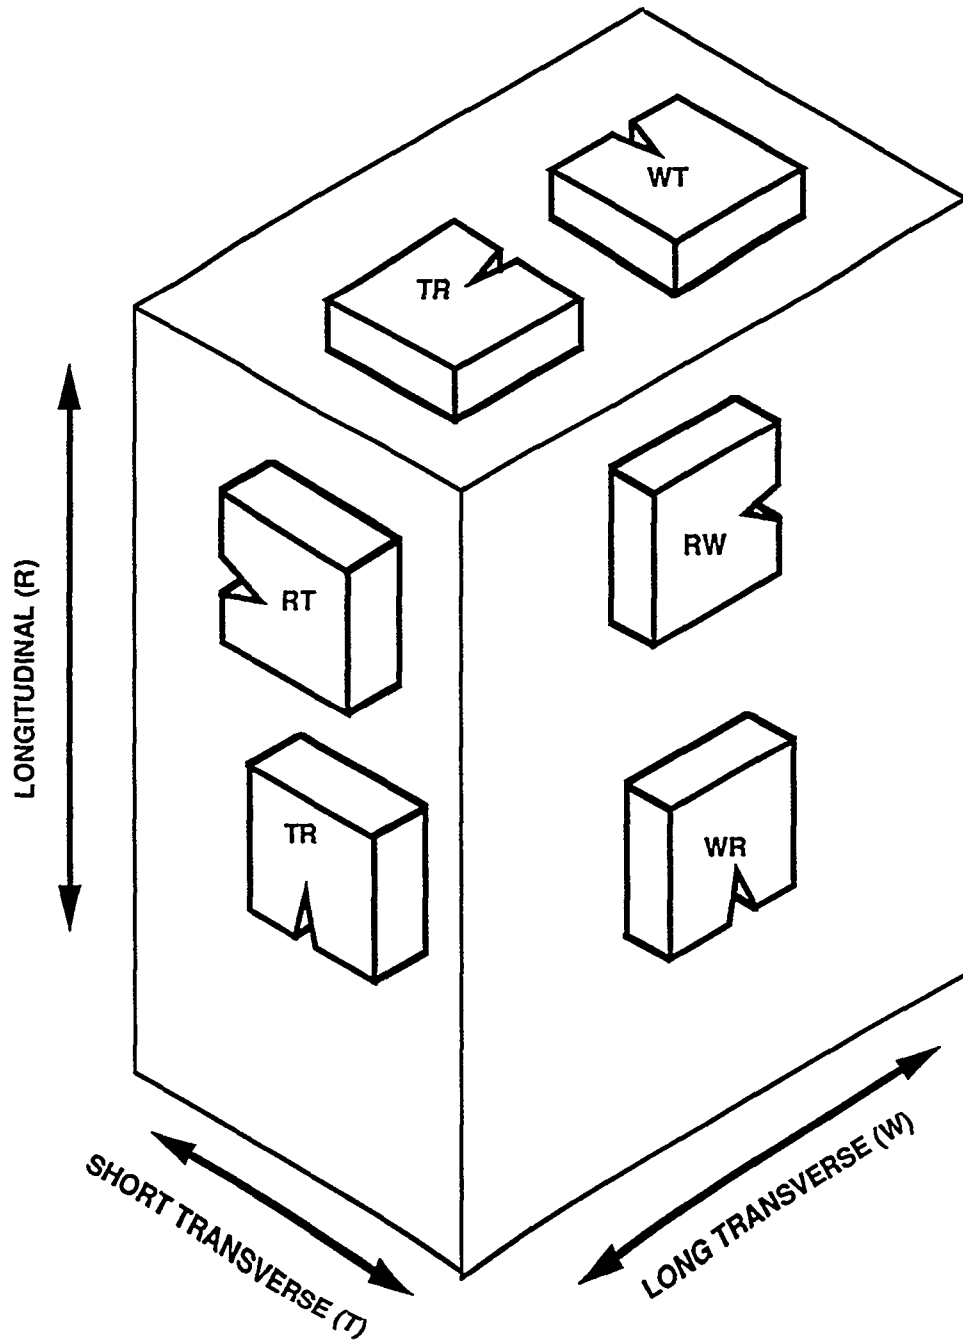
CRACK ORIENTATIONS IN FORGINGS.
